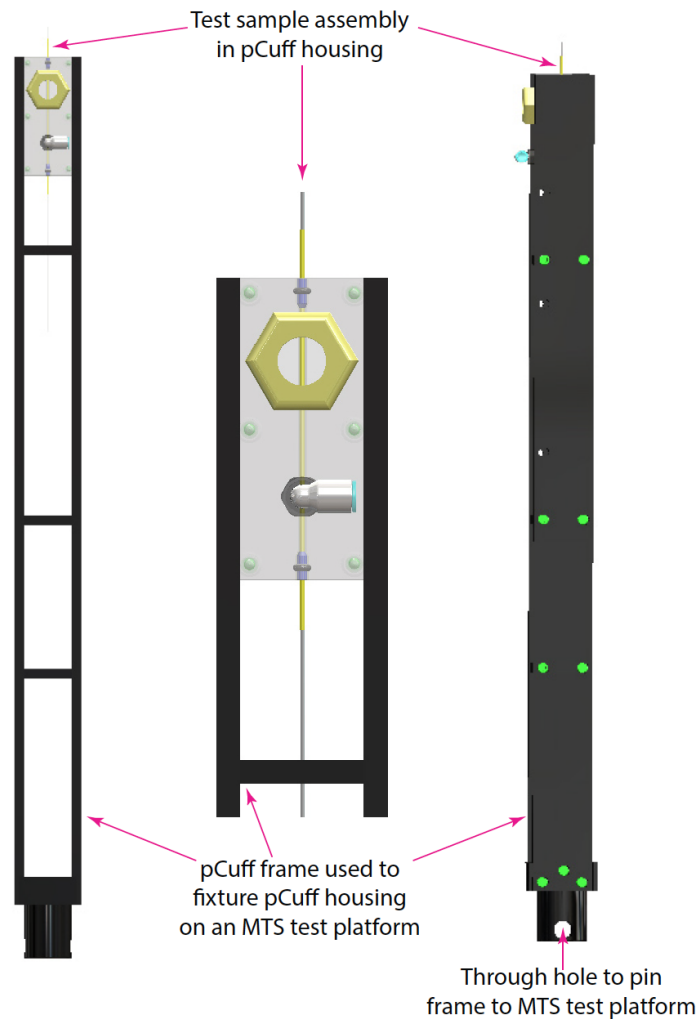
Pressure cuff housing held inside of custom frame - drawings
